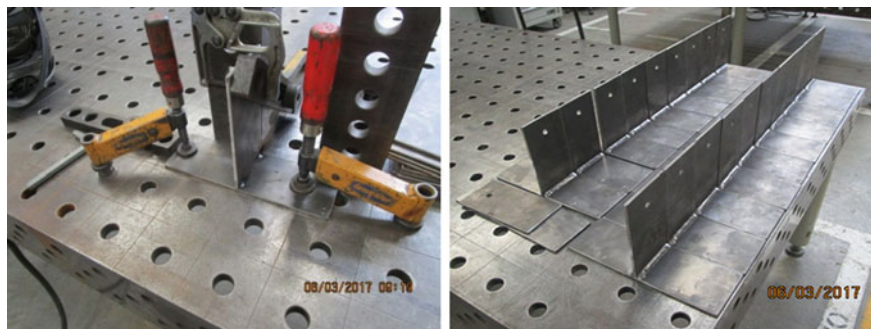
Tack welding of the T-joint sample (left) before final welding (right)
